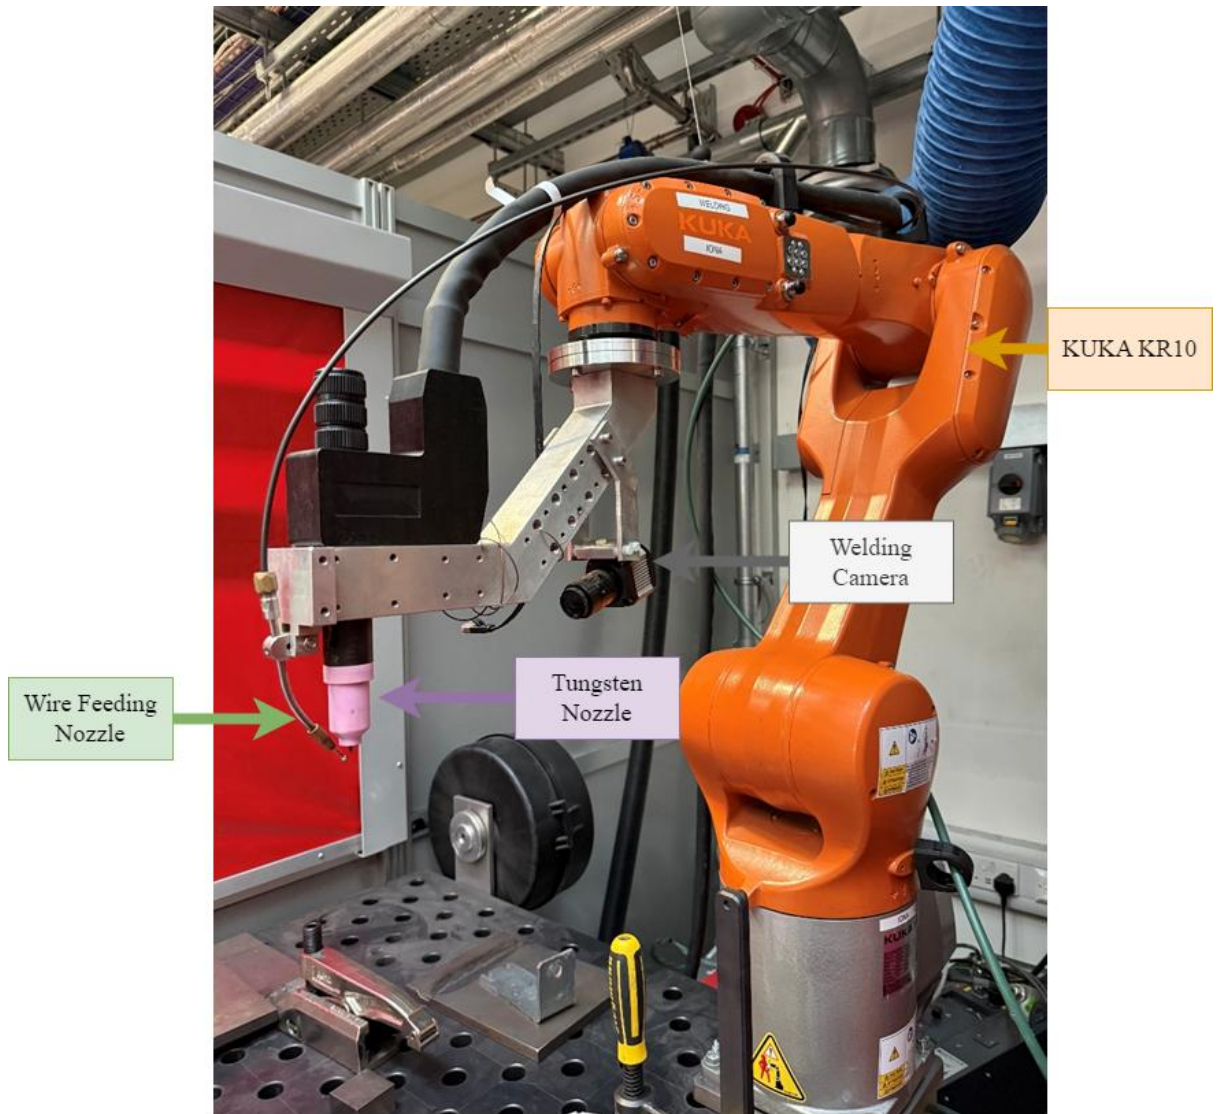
KUKA KR10 welding manipulator with bespoke GTAW torch assembly. The wire feeding nozzle (green arrow), non-consumable tungsten electrode nozzle (purple arrow), and welding camera (gray box) are identified.
